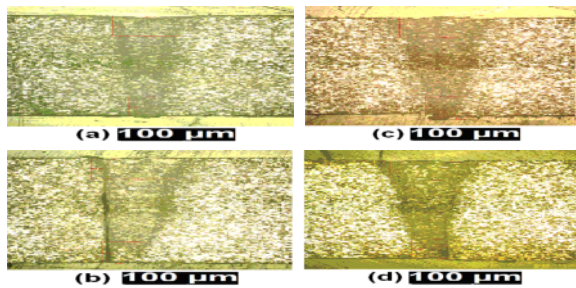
Examples of near net shape from the top side with welding parameters: (a) laser power (P): 550 W, welding speed (S) 100 mm/s, and Fpp: -3.00 mm, (b) P: 525 W, S: 105 mm/s, (c) P: 550 W, S: 90 mm/s, and Fpp: -2 mm, and Fpp: -1.50 mm, (d) P: 550 W, S: 100 mm/s, and Fpp: -1.0 mm.
